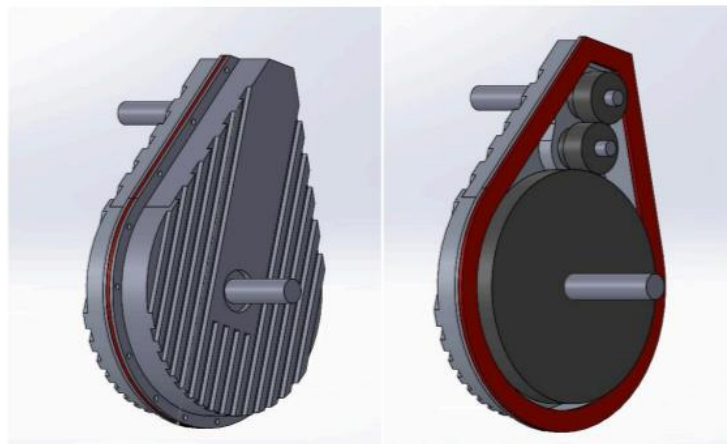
Gearbox Assembly (Left), Internal View of Gears & Inner Shell (Right)
